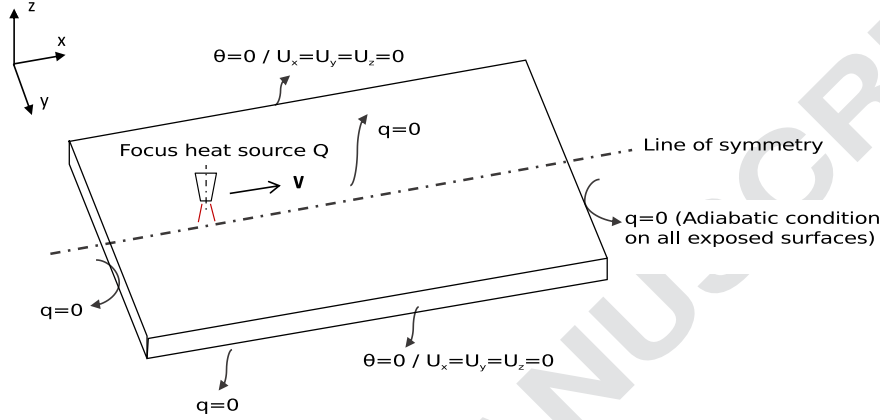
Welding work-piece: geometry and boundary conditions.
